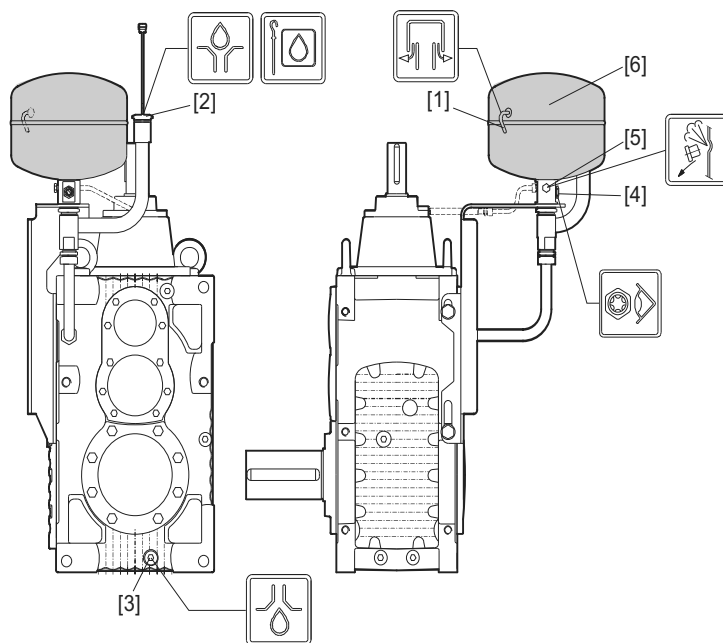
MC.PE../MC.RE.. industrial gear units with steel oil expansion tank
